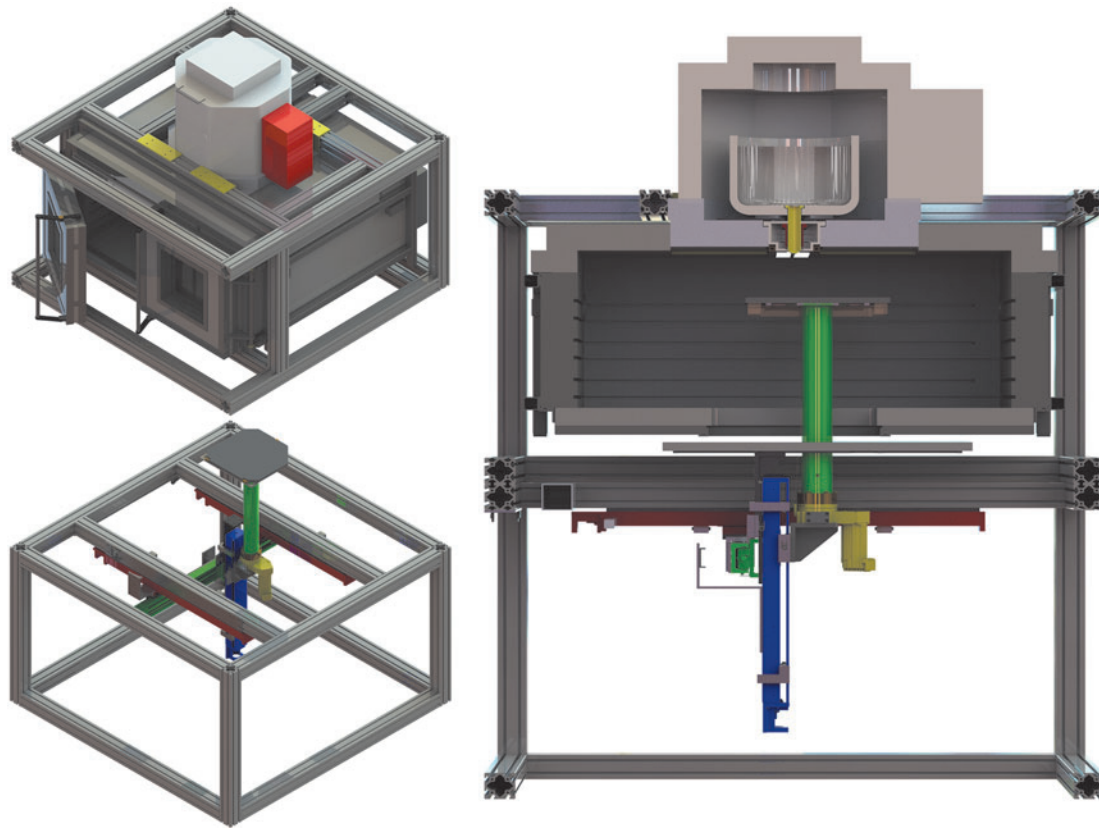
Left*: an exploded view of the upper thermal module and the lower motion control module. *Right*: a cross-section of the entire system that reveals the interior detail.
